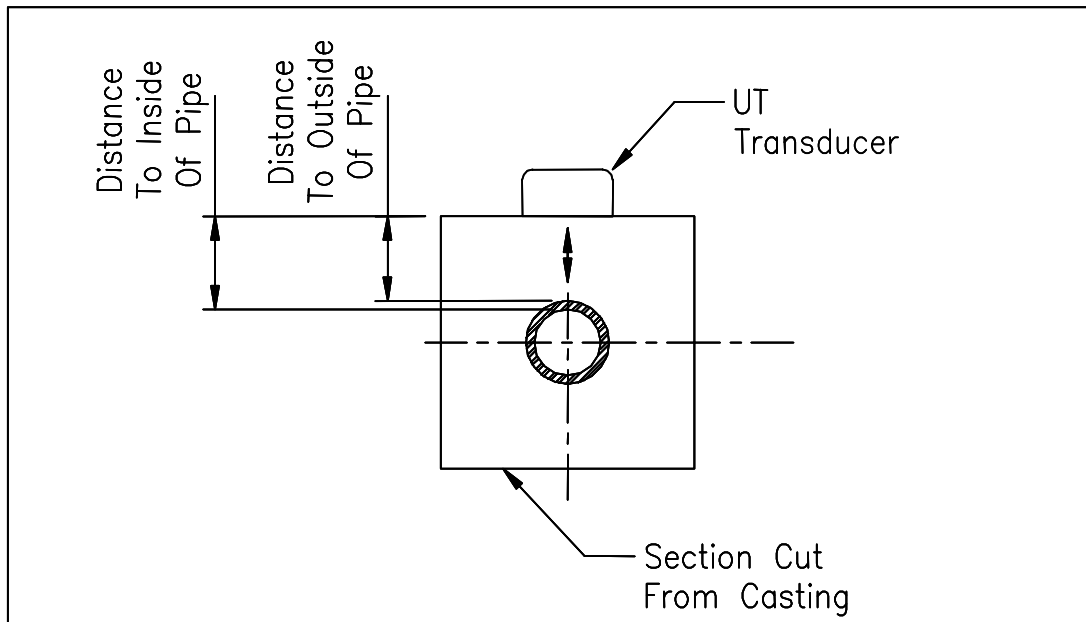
Ultrasonic Testing Arrangement for Cut Samples.
